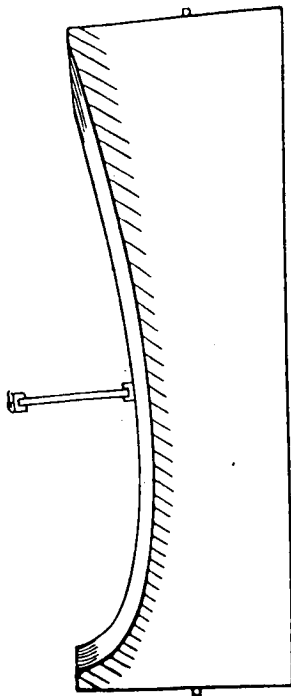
Bonding of Shear Web To Lower Half Shell Placement Is Checked
